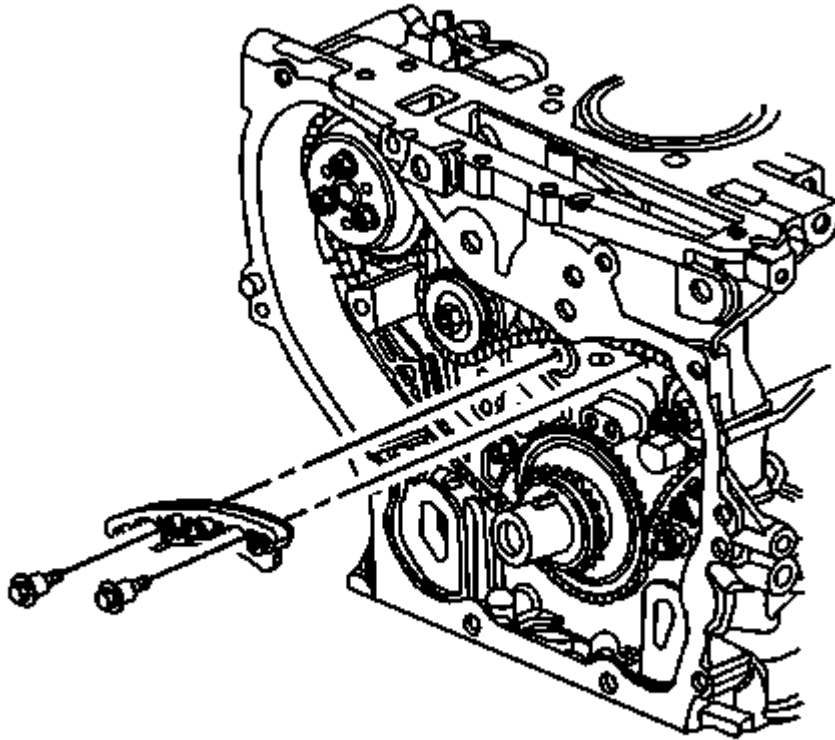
Identifying Upper Balance Shaft Drive Chain Guide
